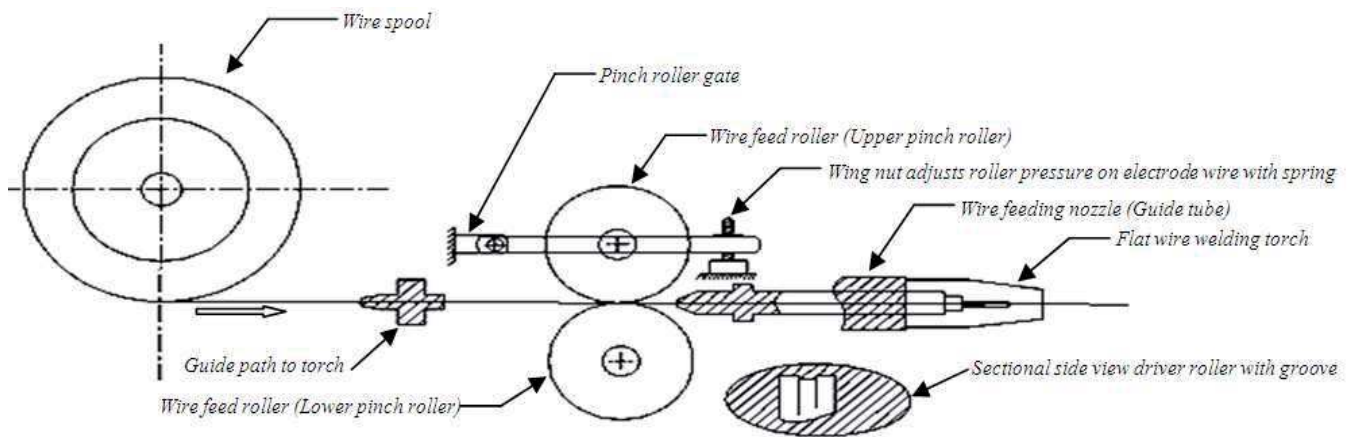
Schematic diagram of strip wire welding system with torch and feeder arrangement
